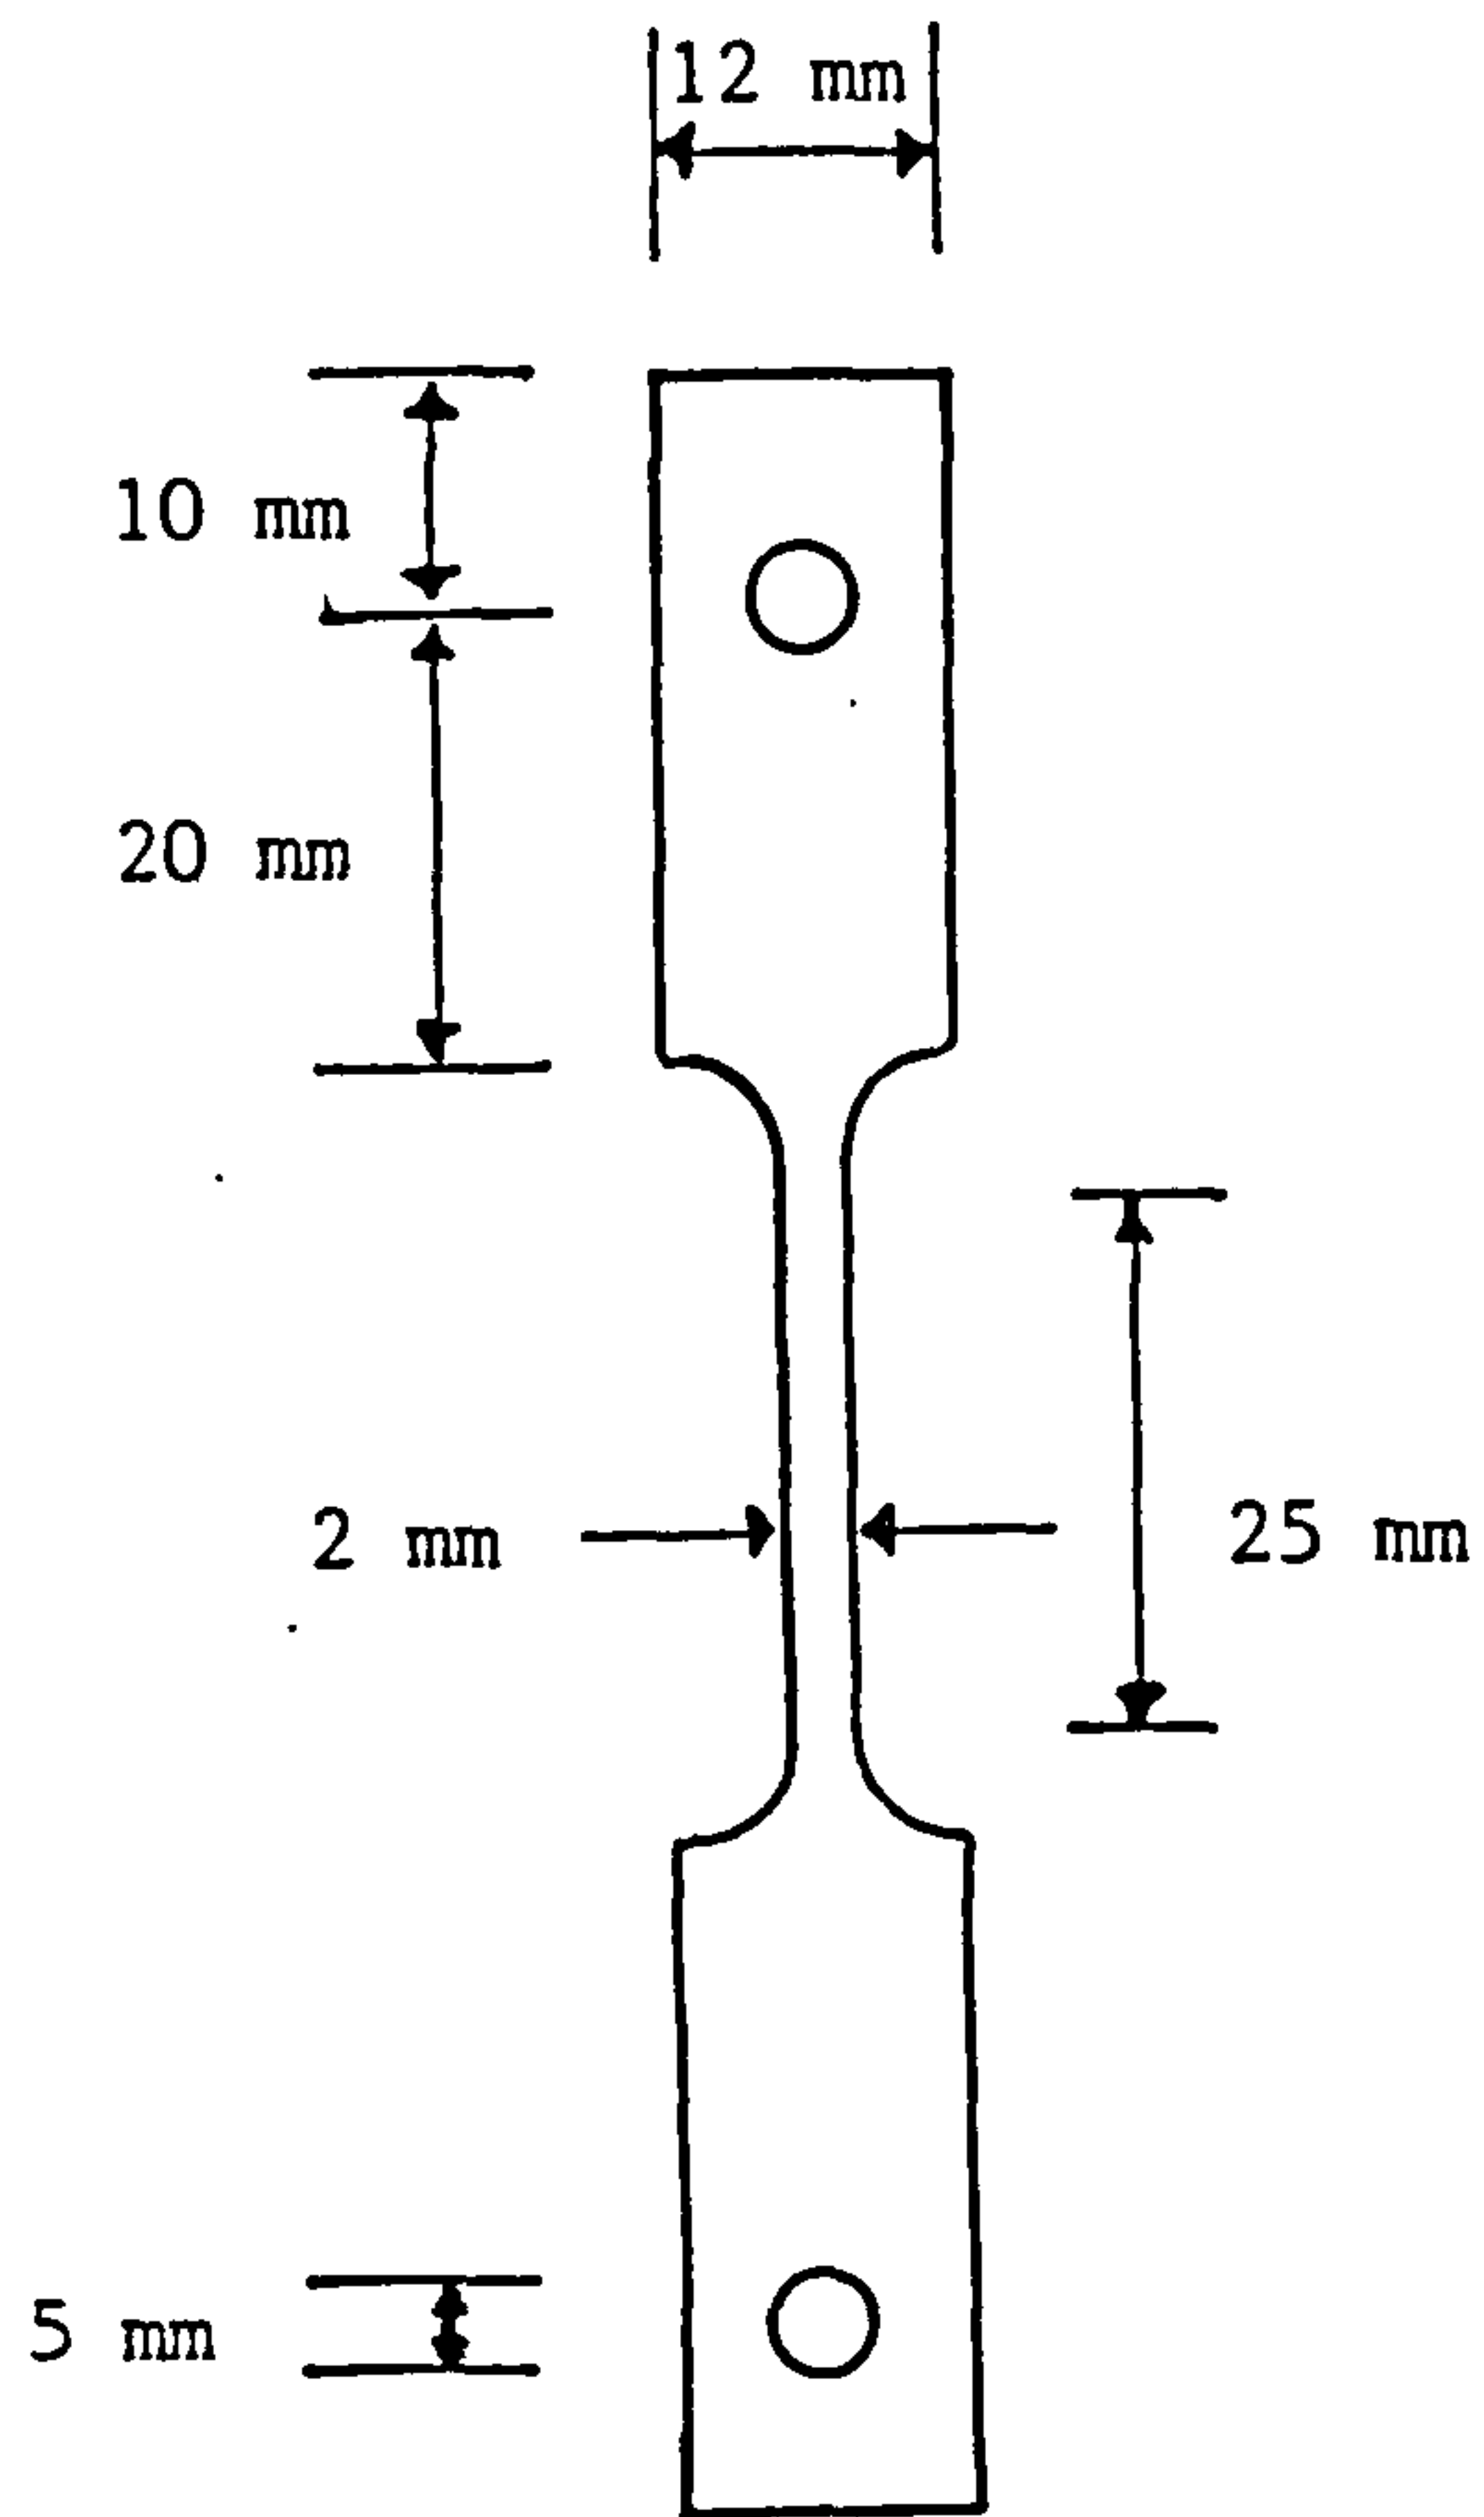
Dimensions of sheet specimens machined from AISI 4340 steel.
